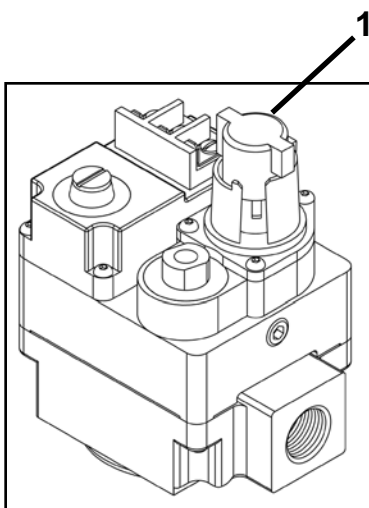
Gas Line and Burner Assembly - CE, Int'l, and Electronic Ignition
